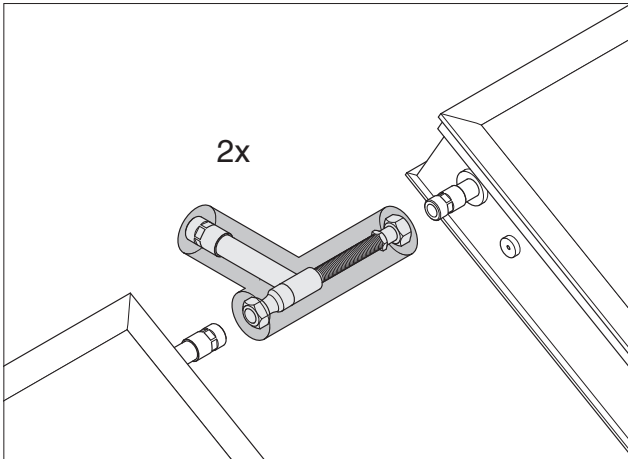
Connection set prod. no 190 202 30 for 2 horizontal collectors: 2 insulated T-connector pieces with 2 x 1/2" swivel nuts and 1 x 3/4" M thread.
